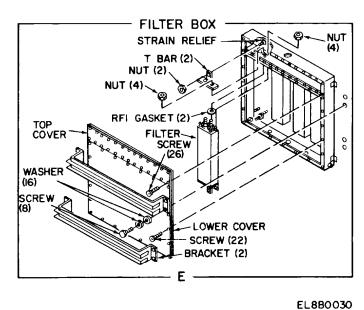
Removal and Installation of Direct Support and General Support Repair Facility Components/Assemblies (Sheet 3 of 4)
